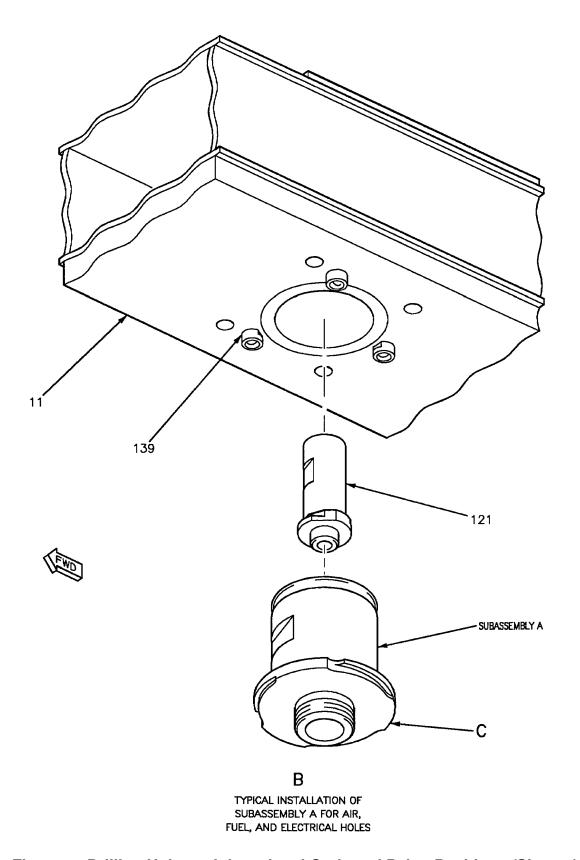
Drilling Holes at Inboard and Outboard Pylon Positions (Sheet 3)
